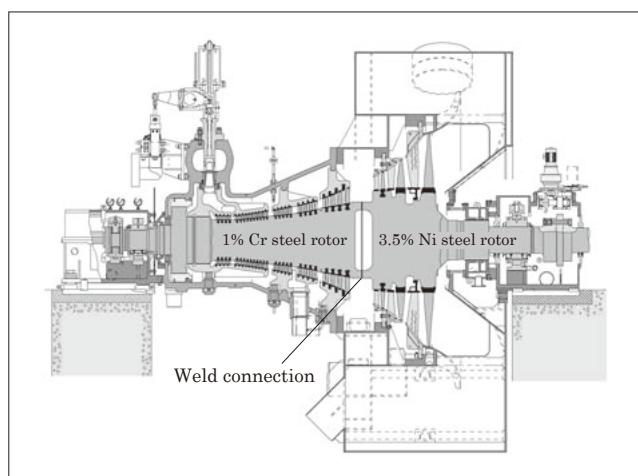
Steam turbine using rotor made from welded dissimilar materials
